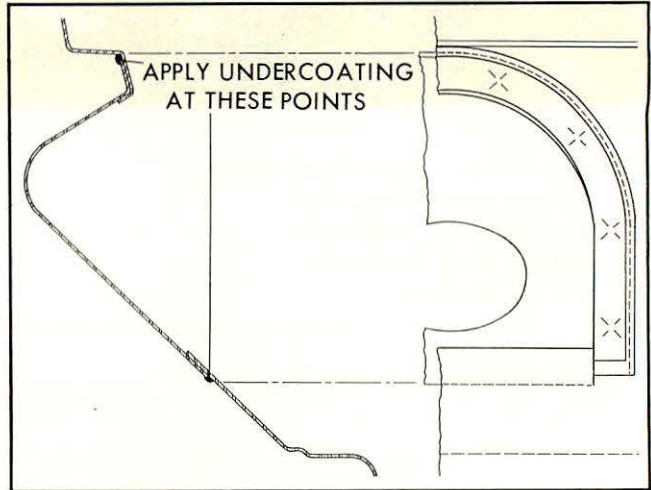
SEALING LOWER BACK PANEL WELD SEAM
